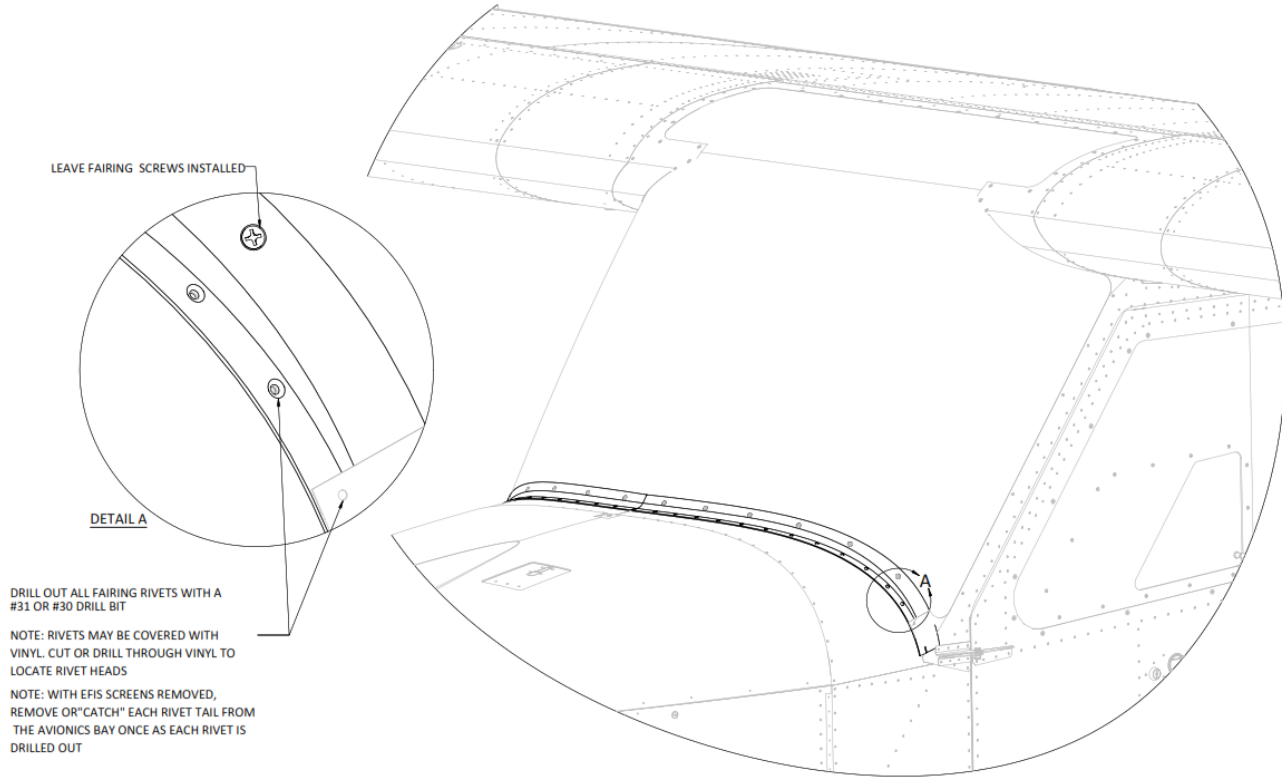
Drill out windscreen base fairing rivets.
